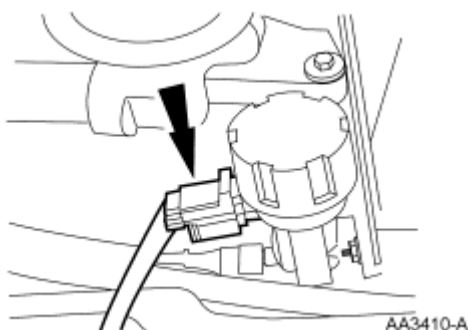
EGR Vacuum Regulator Solenoid Electrical Connector
